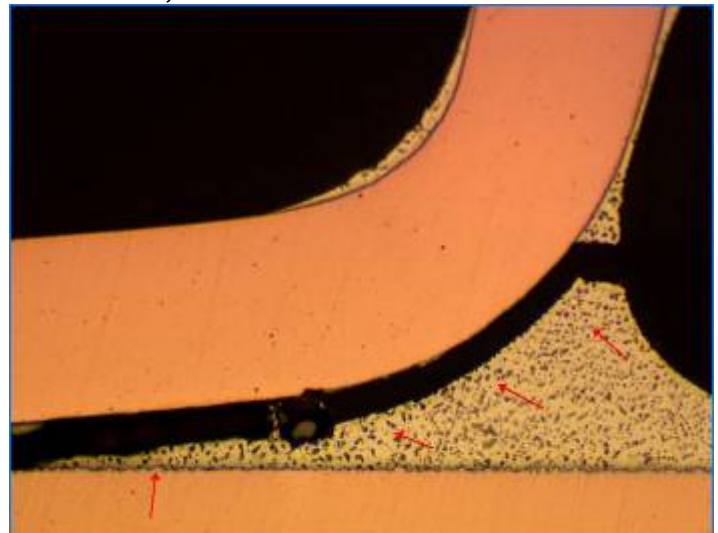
cross section, SN67, U31, left lead solder crack, 200xb
